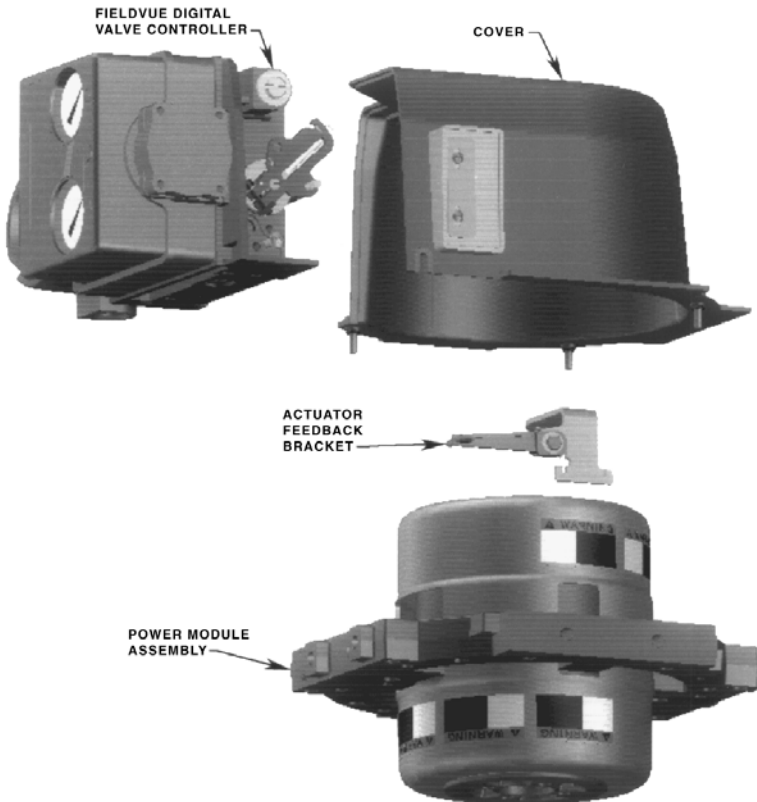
Piston cylinder actuator with canister assembly and integral positioner. (Courtesy of Fisher Controls International, Inc.)
